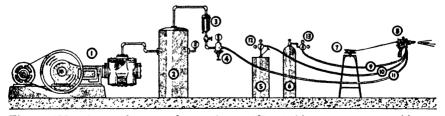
A complete metal spraying outfit: 1 Air compressor; 2 Air receiver; 3 Moisture filter; 4 Air pressure regulator; 5 Acetylene tank; 6 Oxygen tank; 7 Wire reel; 8 Metallizer; 9 Oxygen hose; 10 Acetylene hose; 11 Air hose; 12 Acetylene pressure regulator; 13 Oxygen pressure regulator; 14 Adequate sand blast equipment
